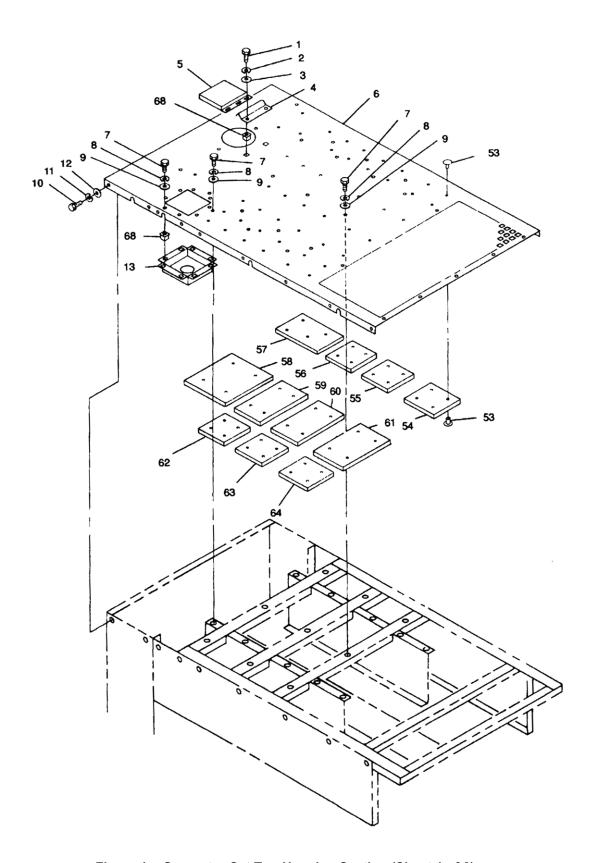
Generator Set Top Housing Section (Sheet 1 of 2).
